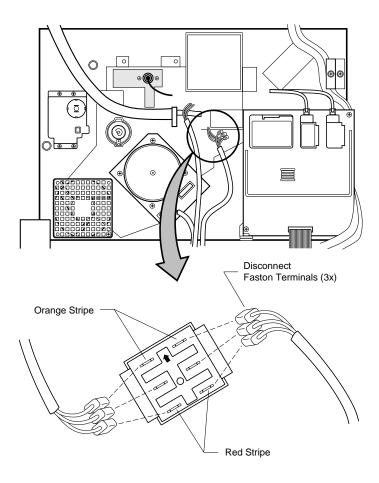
Fuser Unit Interlock Switch (TINTSW)
